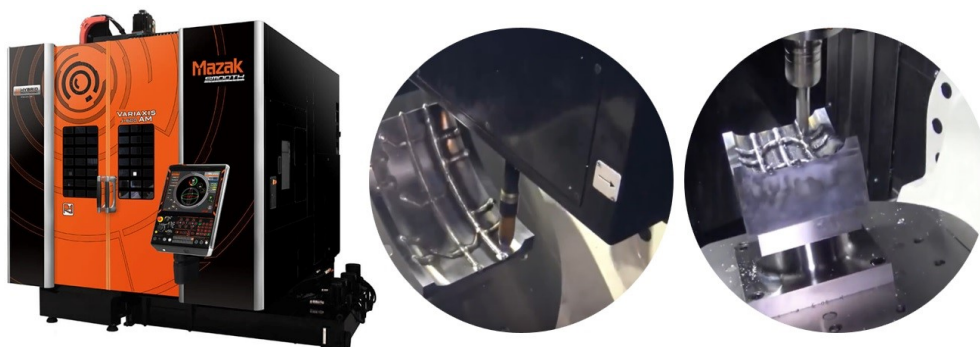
The Variaxis J-600AM WAAM machine from Mazak (left). An additive operation and a milling operation performed on the machine (right)
